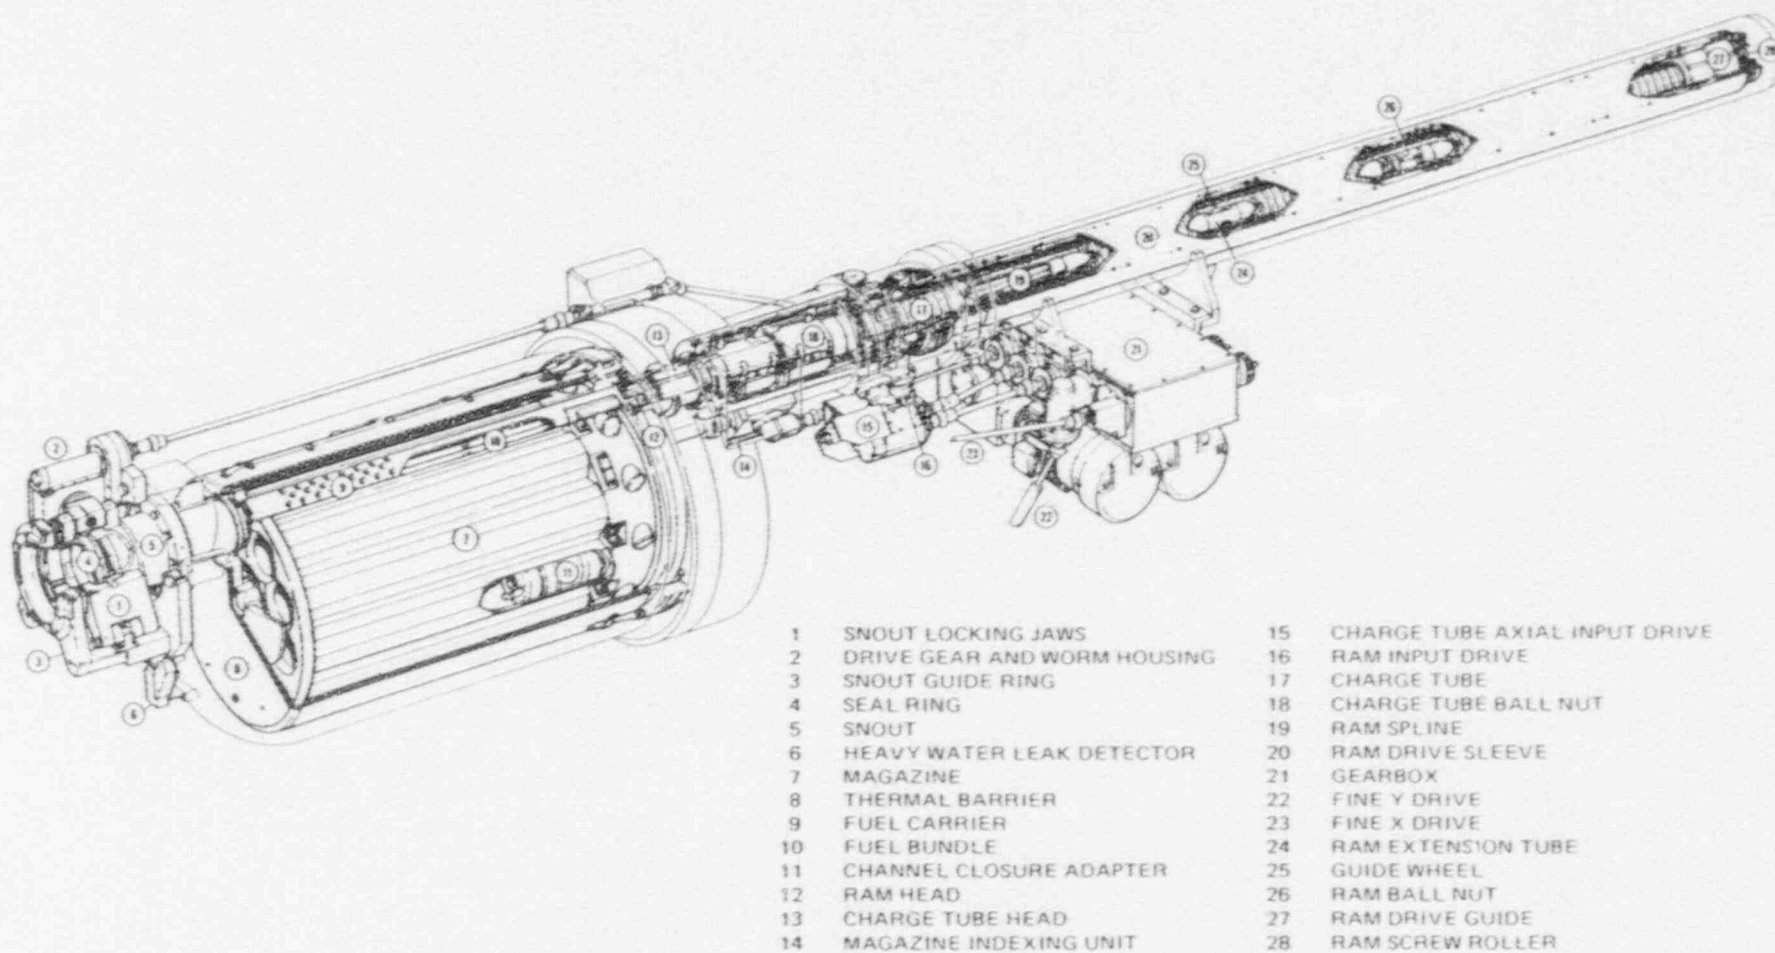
BRUCE/DARLINGTON FUELING MACHINE HEAD
